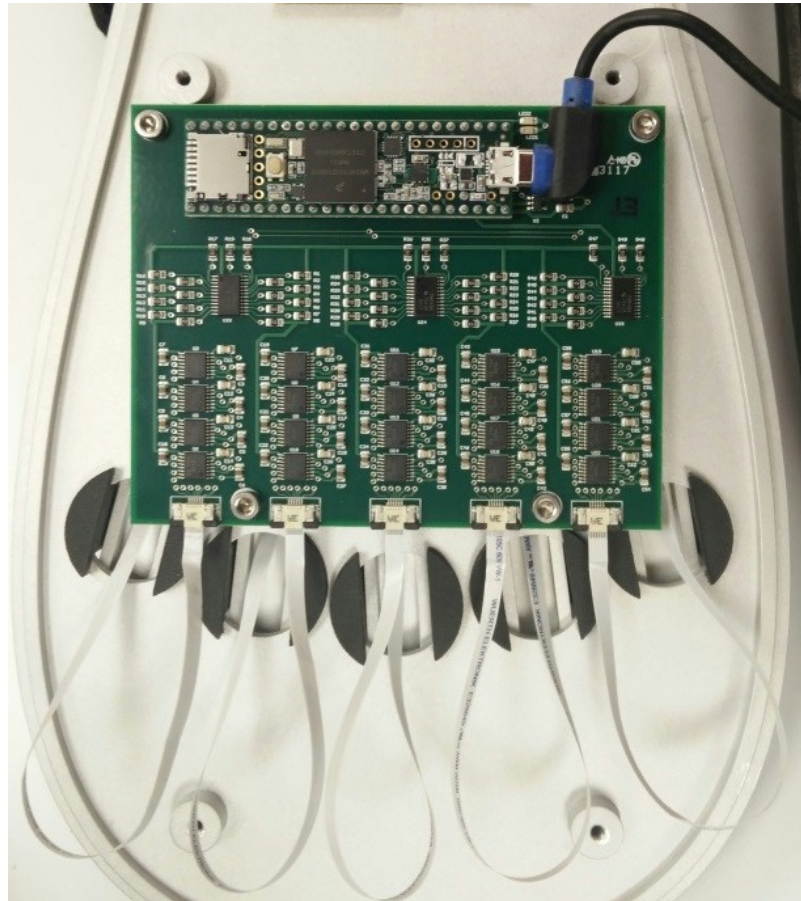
Final DAQ board A finalized PCB board is installed in the Hand Device and connected to a micro USB cable and to the finger beams underneath.
